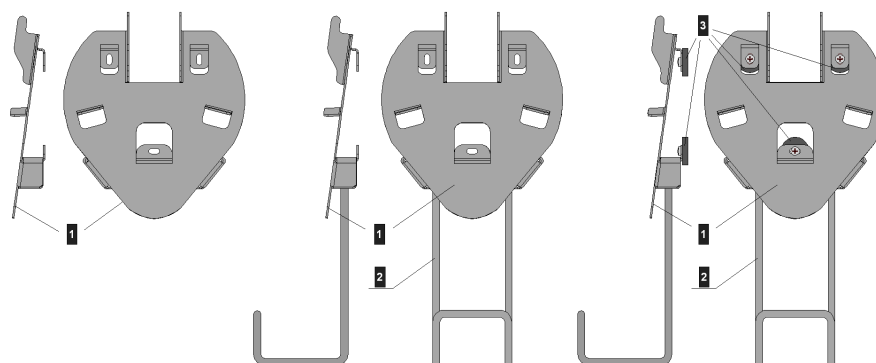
Wall brackets KeTop WB090, WB095 and WB120
